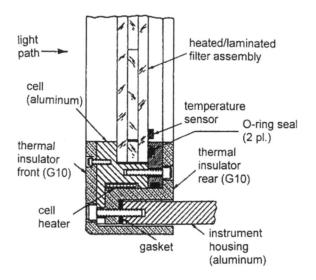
Schematic sectional view of the mount for the filter subassembly shown in Fig. 5.19. (Courtesy of Goodrich Corp., Danbury, CT.)
